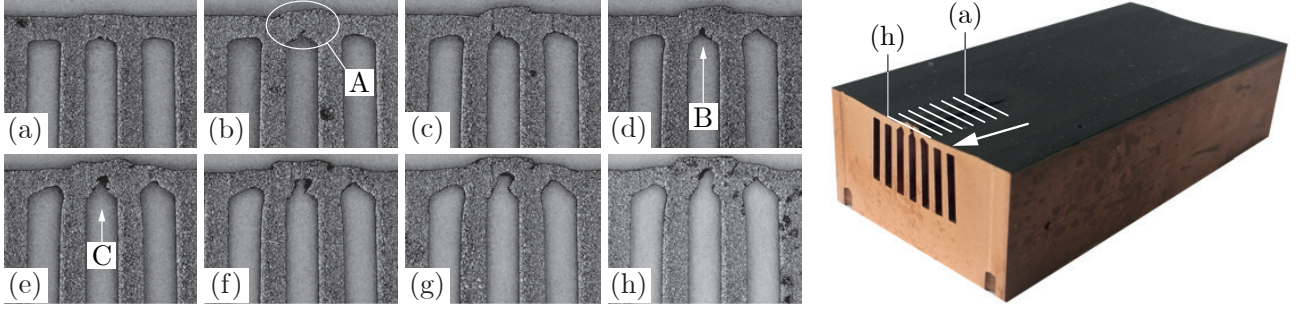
Cross-sectional cut outs along the crack of the ruptured 2G TMF panel.
